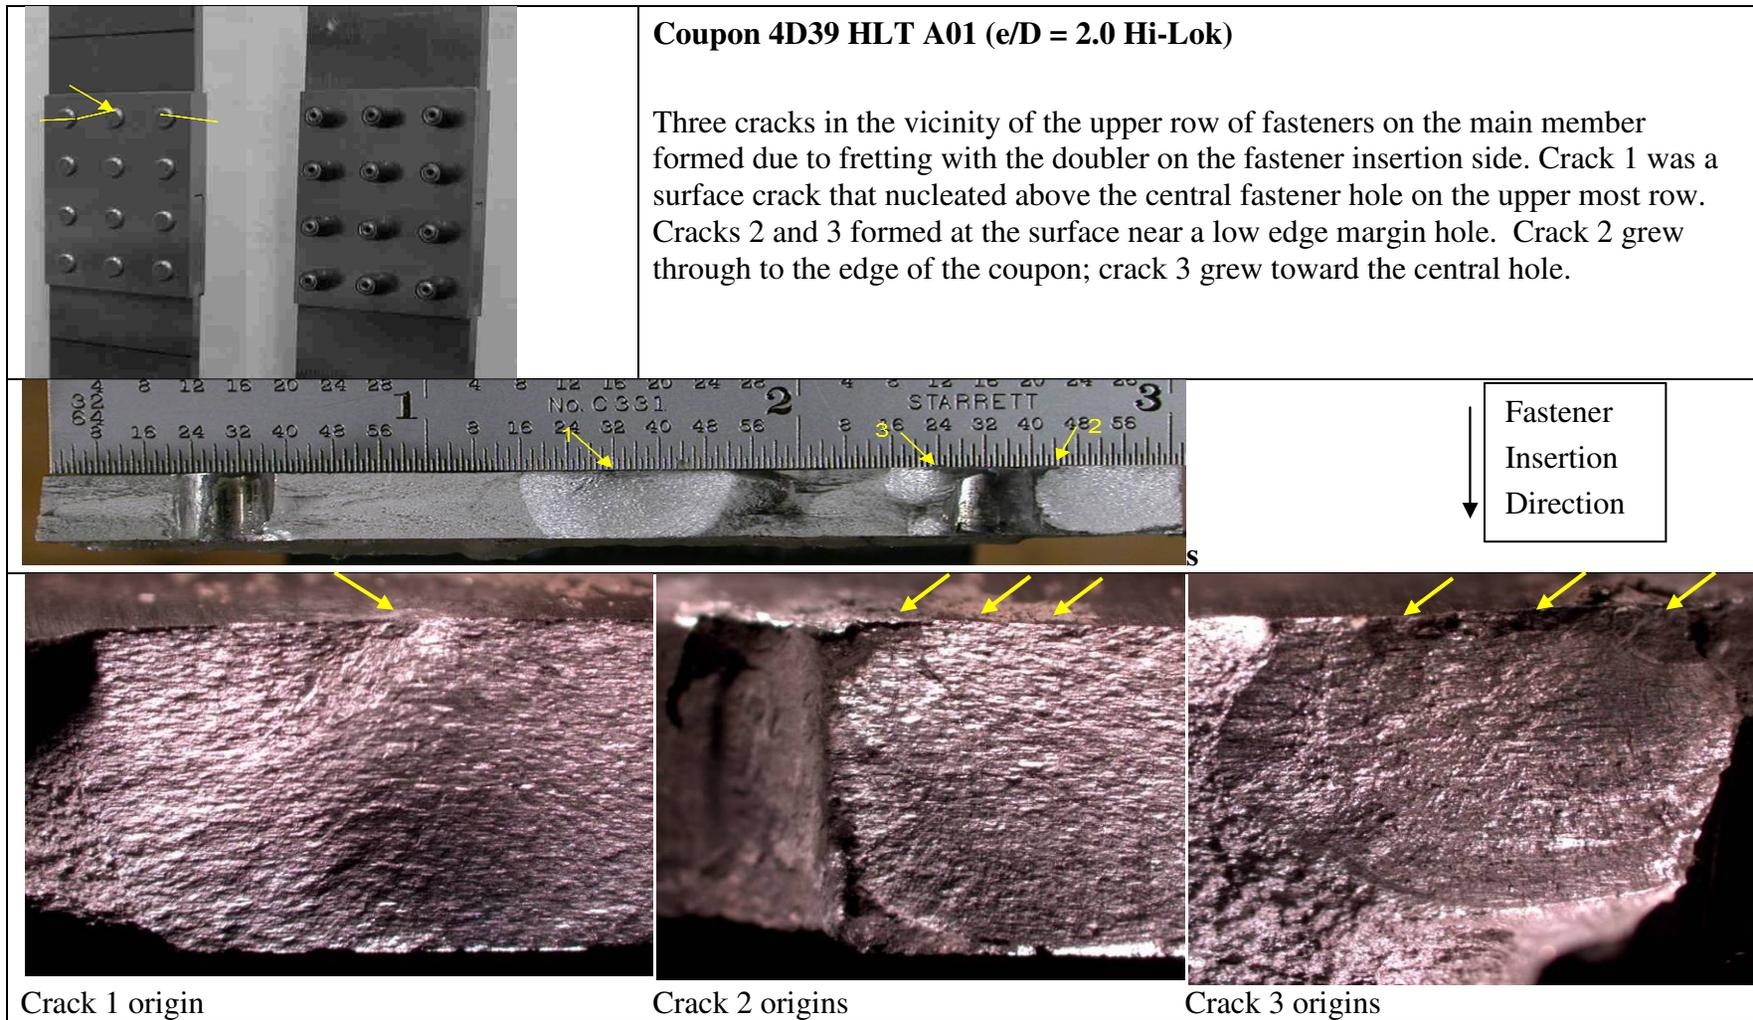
Failure surfaces of HLT test A01 with e/D = 2.0 and Hi-Lok fastener (coupon ID 4D39)
